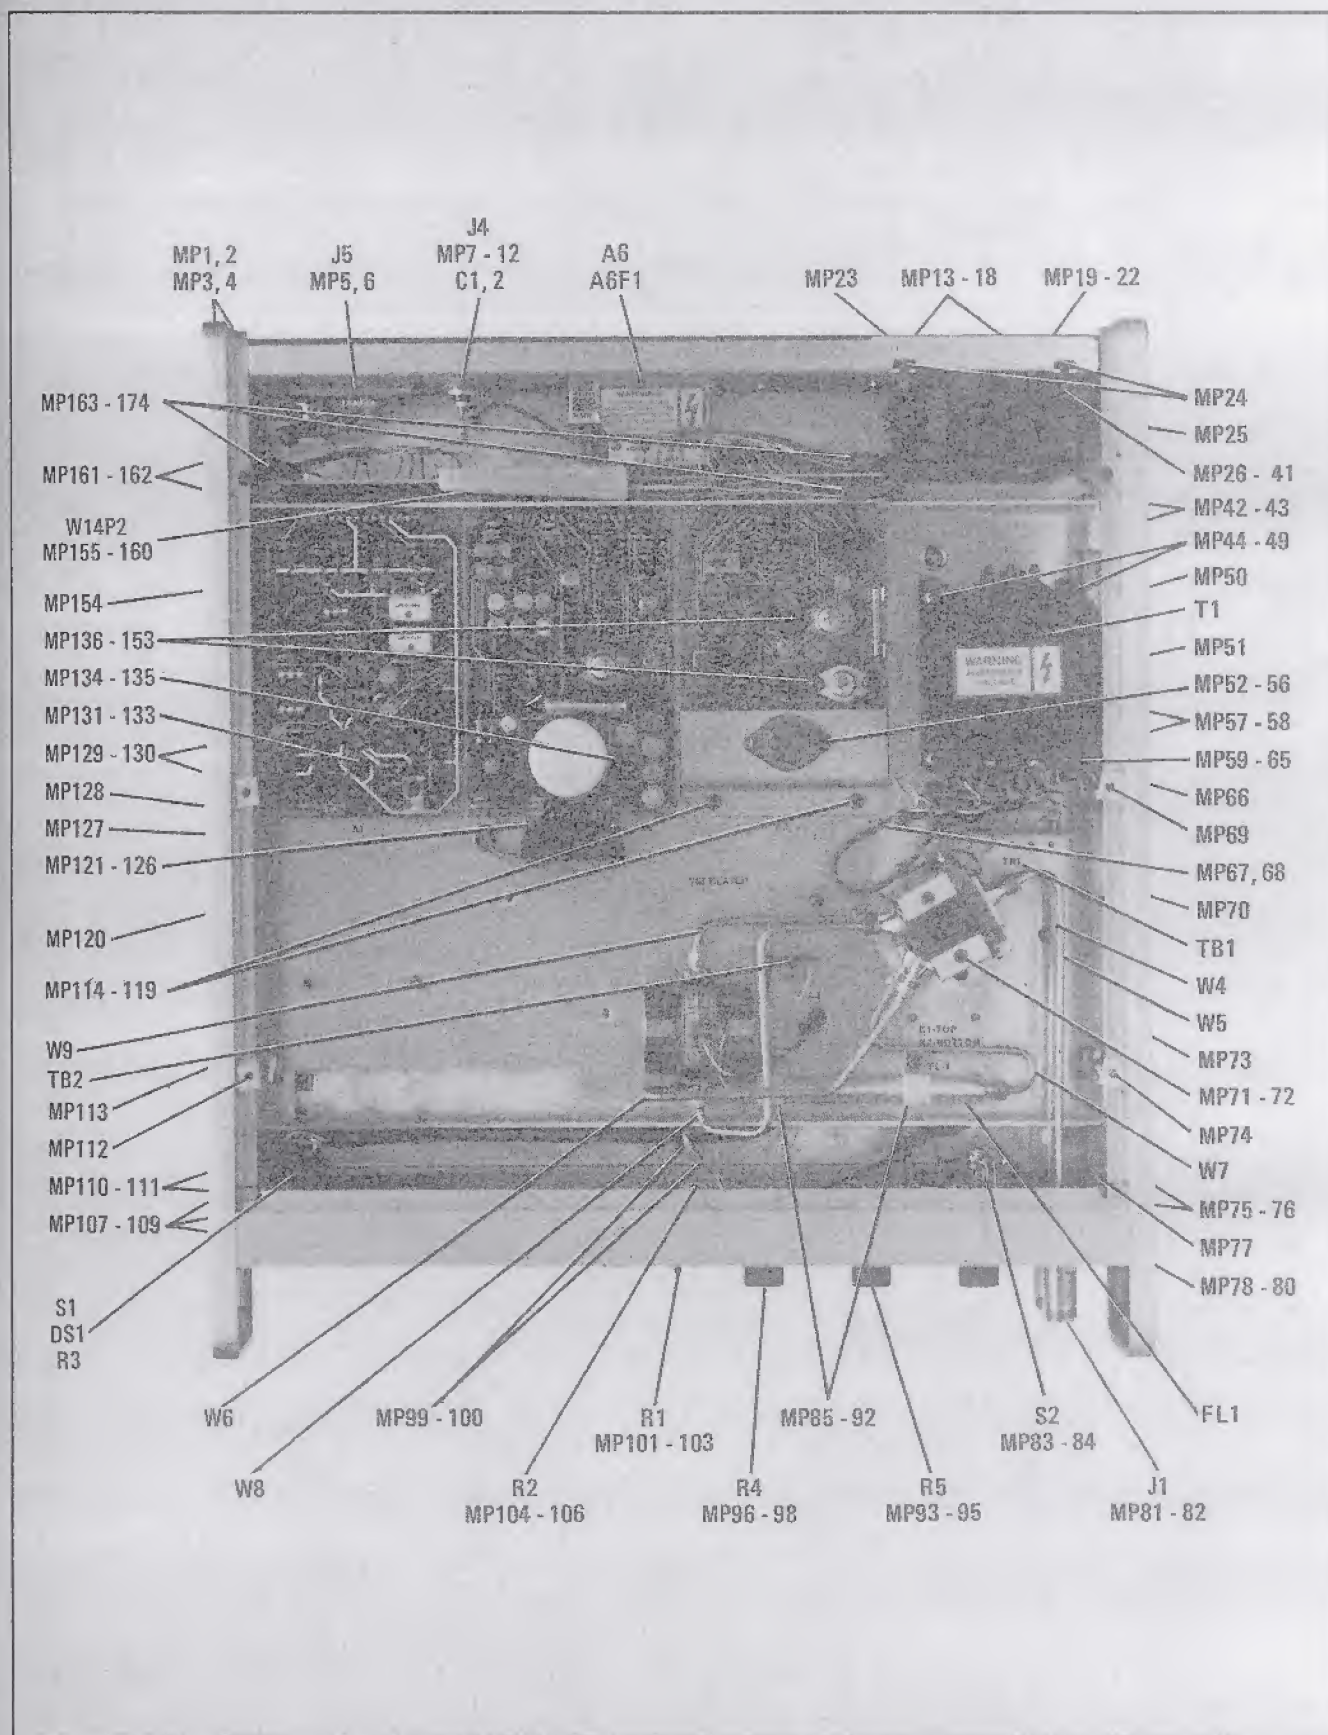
Mechanical Parts Identifiable From Top of Chassis
